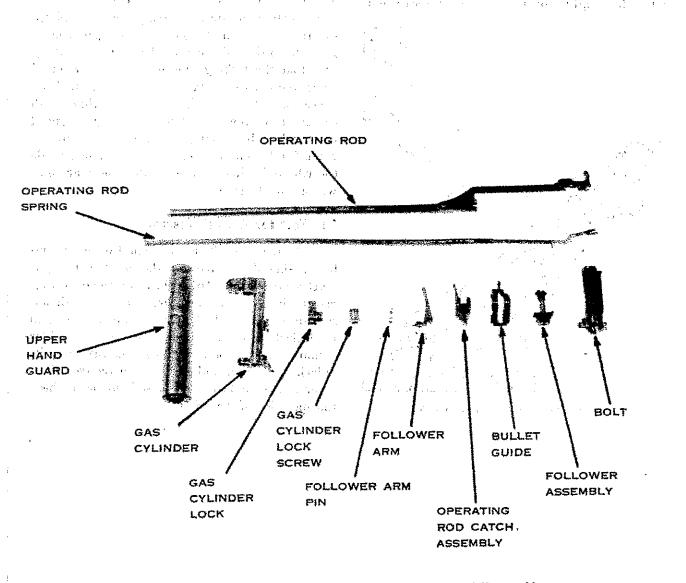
Parts of the barrel and receiver group in the order of disassembly.
